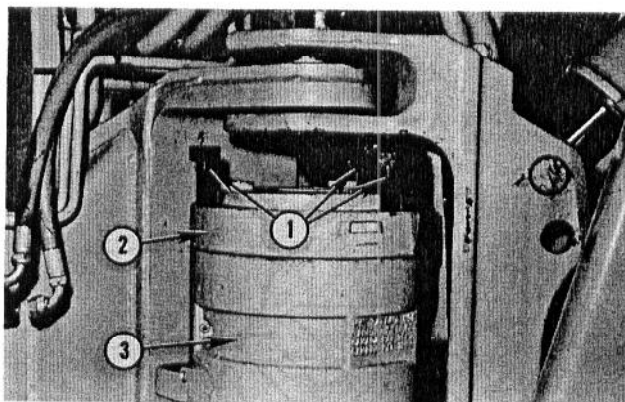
Special Tool "Pusher Bolts" (Tool No. 7236) Installed in Top Plate
